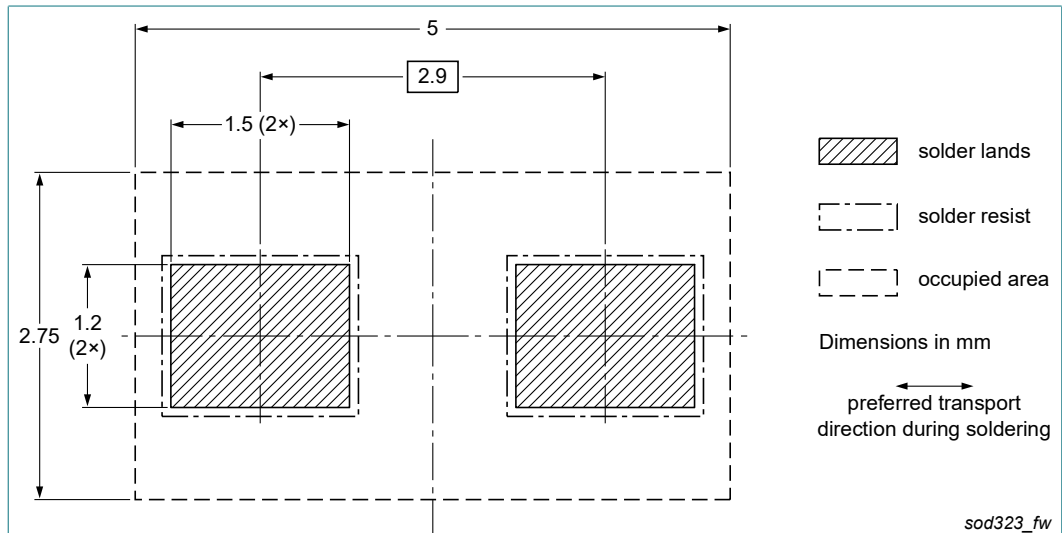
Wave soldering footprint for SOD323 (SC-76)
